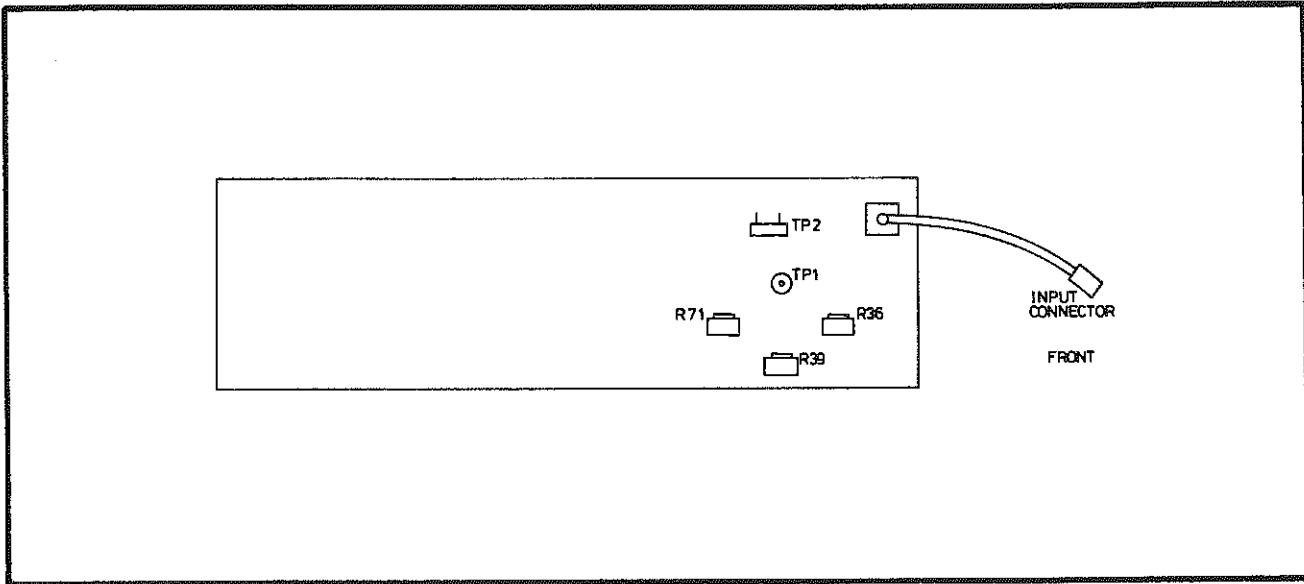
Assembly 19-1300: Location of Potentiometers
